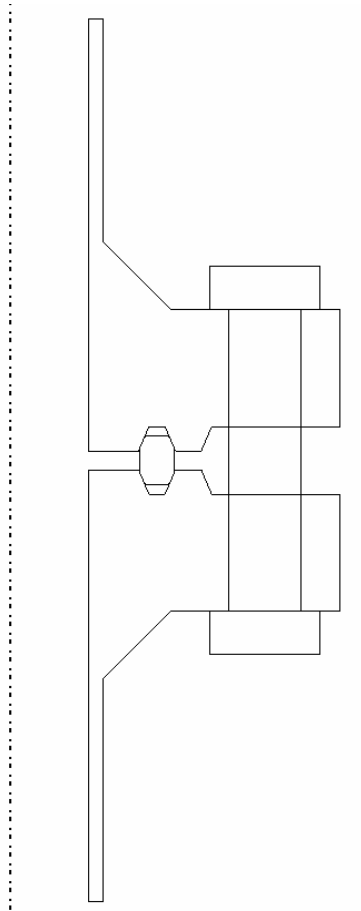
Flanged joint assembly as modelled in Abaqus Standard.
